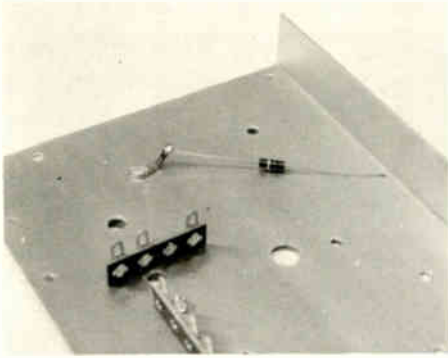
Resistor R_1 soldered to terminal 1.
